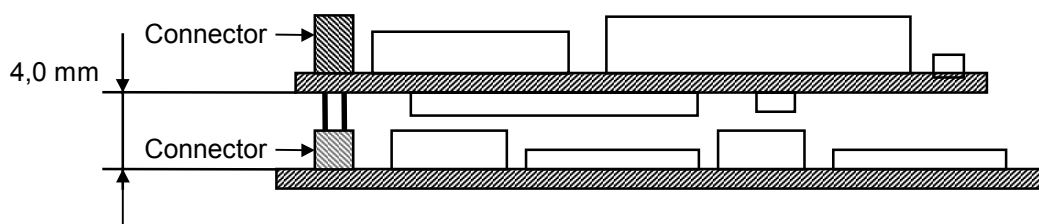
Components fitted on target PCB below HW 86050. Distance between PCBs depend on component heights (here: 4,0 mm)
